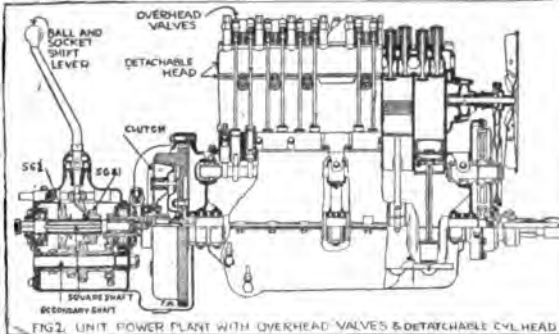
UNIT POWER PLANT WITH OVERHEAD VALVES & DETACHABLE CYL HEAD
